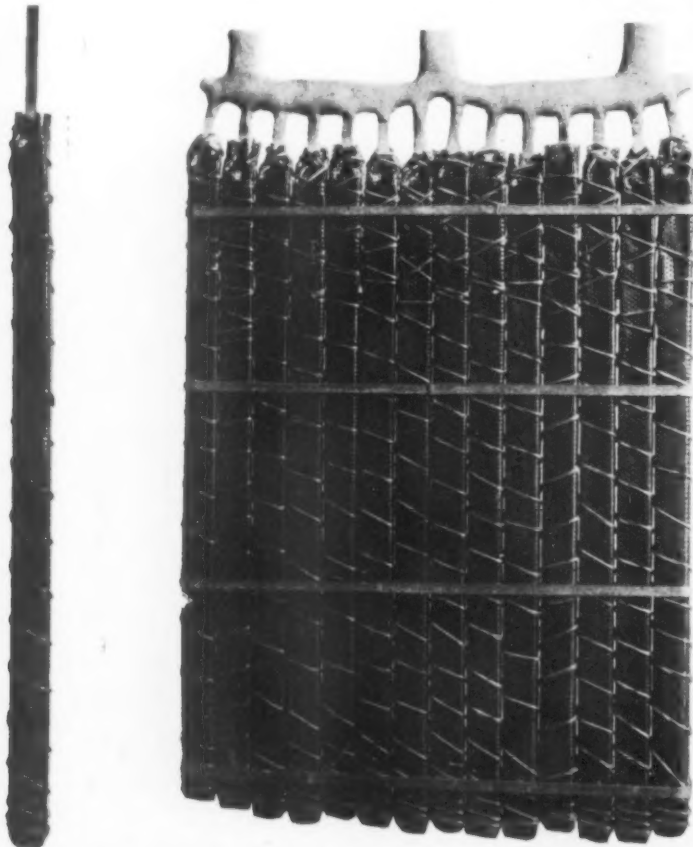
PERRET UNIT. FIG. 2.—UNITS ASSEMBLED, FORMING A PLATE.
